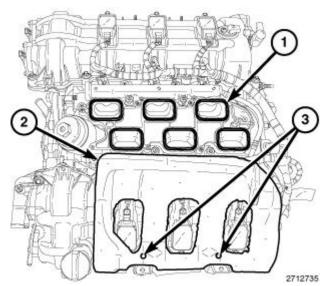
Upper Intake Manifold & Bolts Courtesy of CHRYSLER GROUP, LLC
